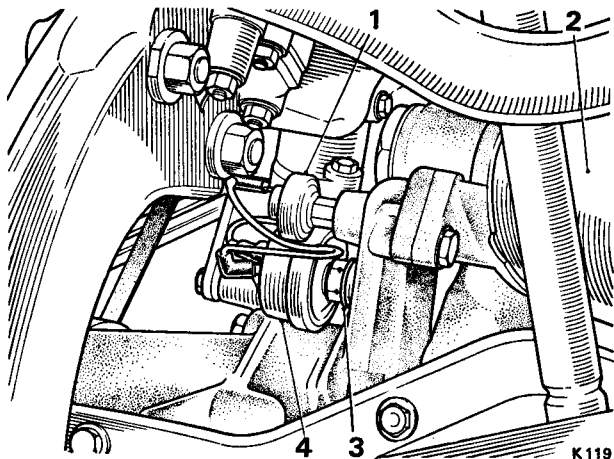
OIL PRESSURE TRANSMITTER LEADS
